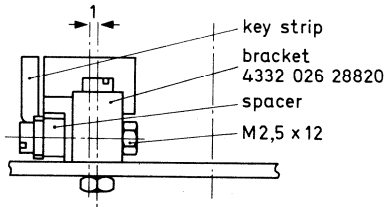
Key strip mounted to a male part with straight dip-solder pins.
